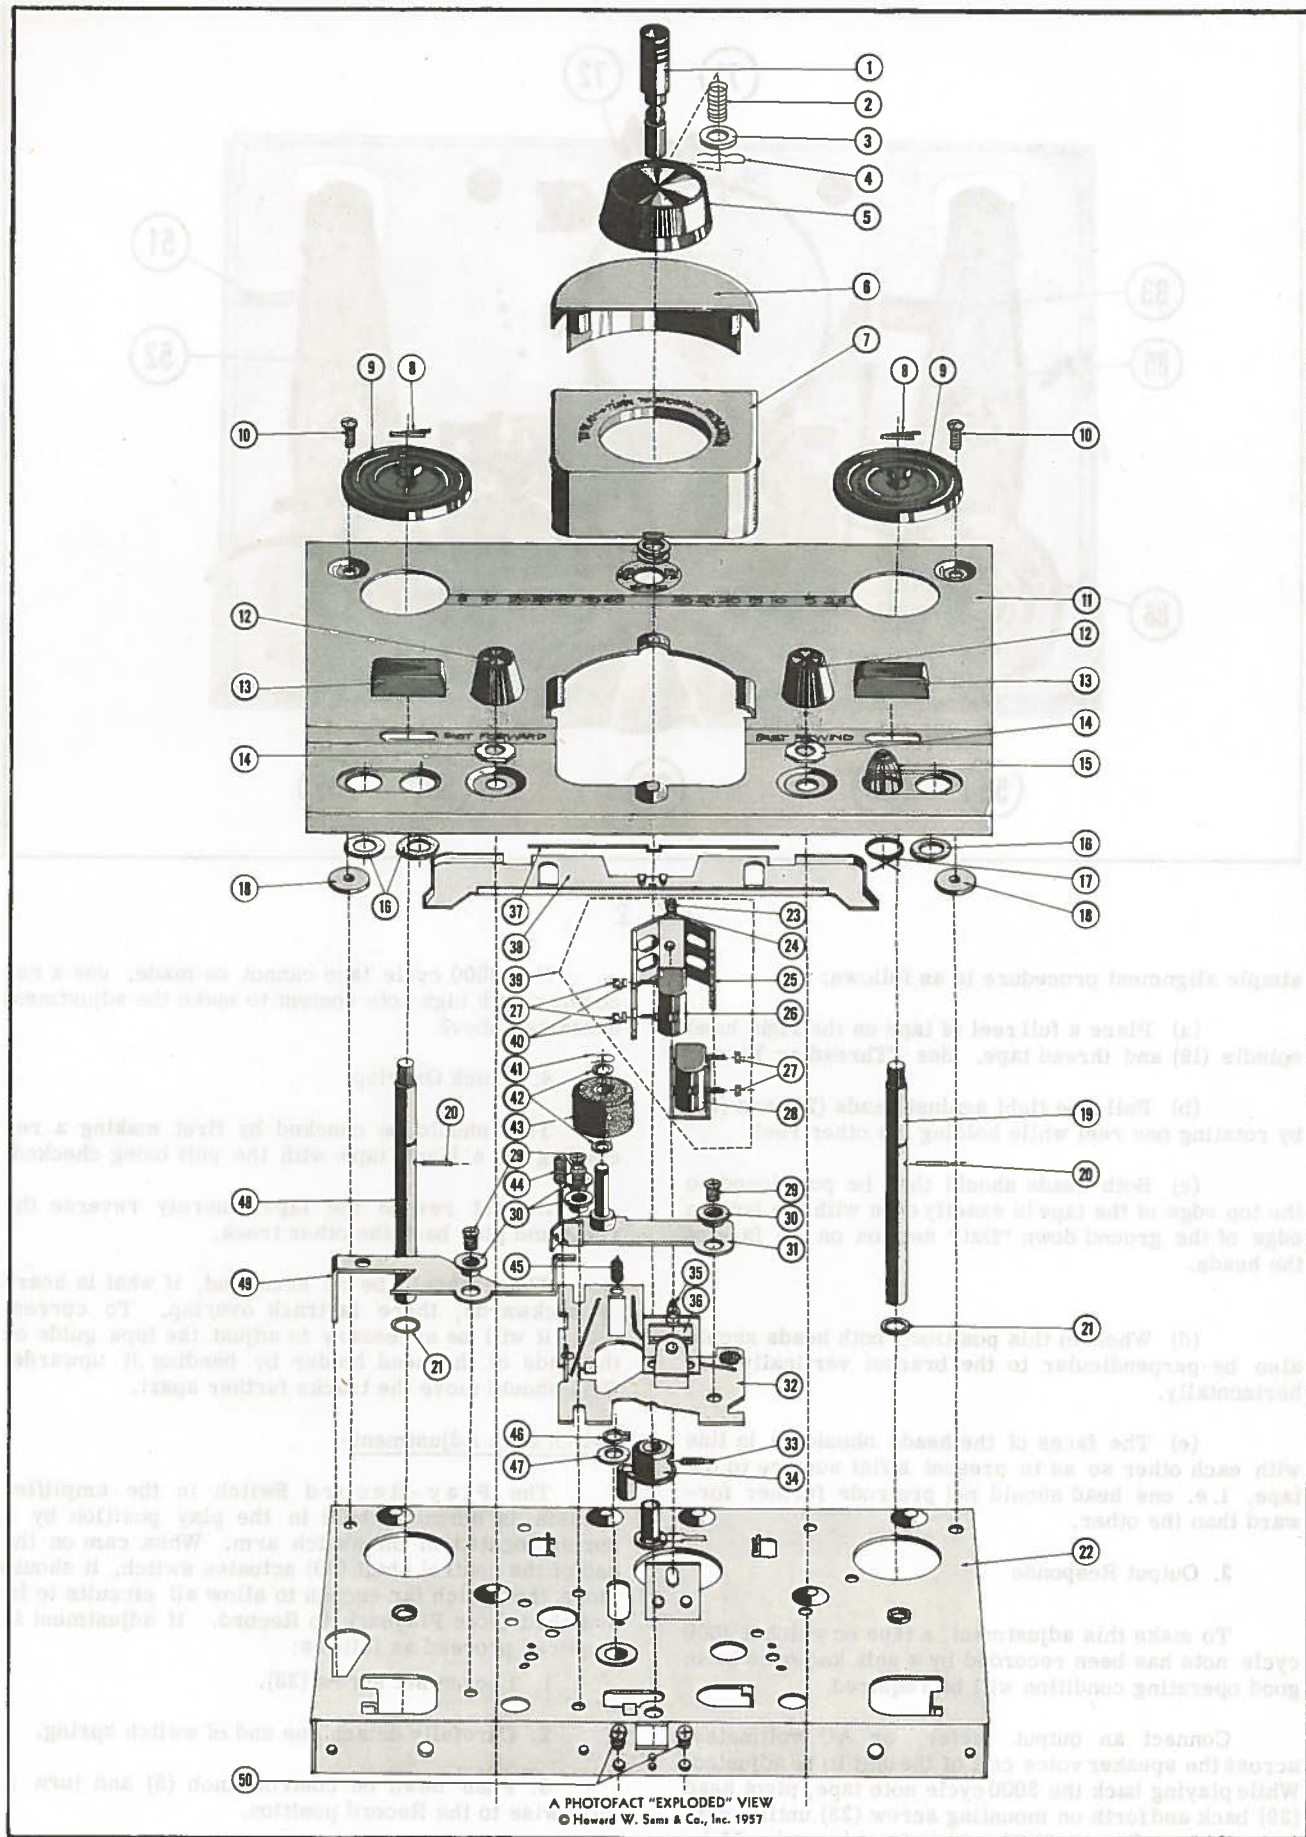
A. EXPLODED VIEW OF PARTS ABOVE BASEPLATE.
